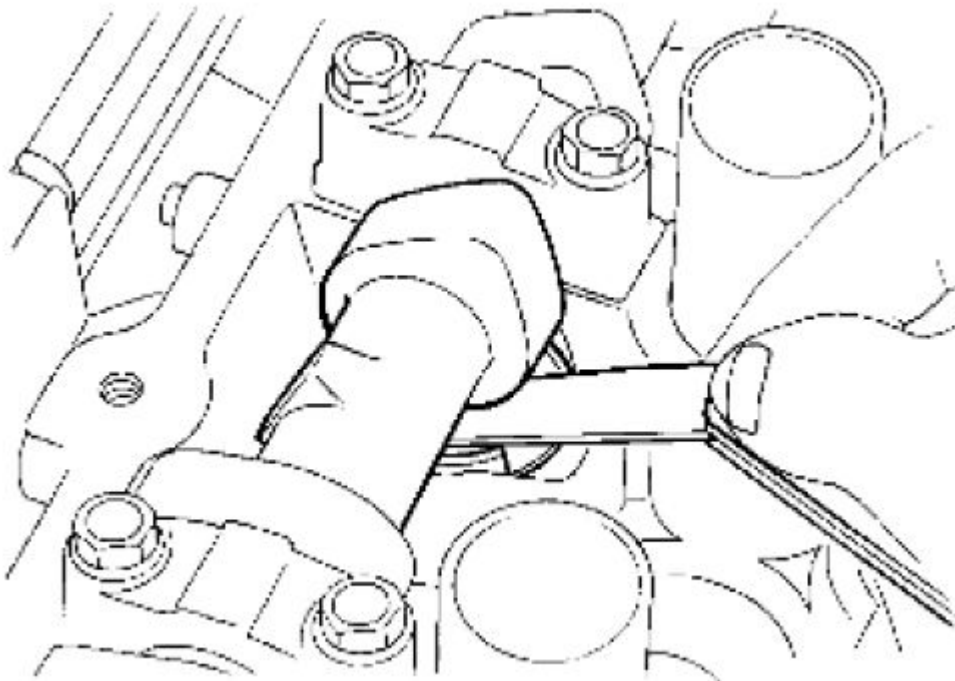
Measuring Clearance Between Valve Lifter And Camshaft
